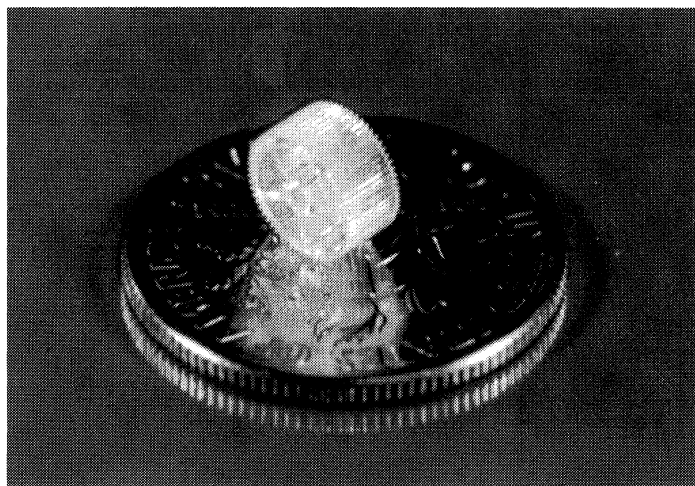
3 mm thick PMMA gear fabricated from free-standing PMMA sheet on top a dime.
